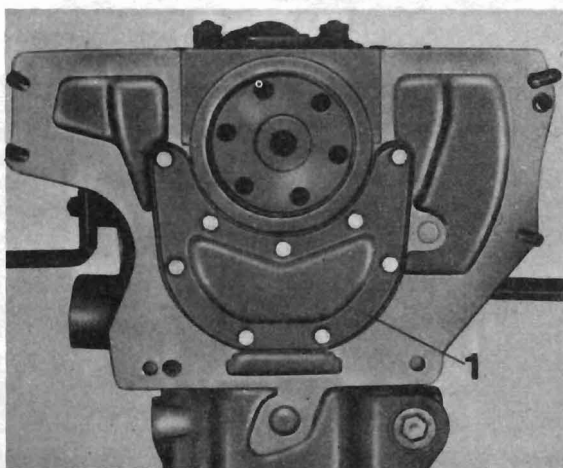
Engine rear cover plate (1) (Sec 12)
